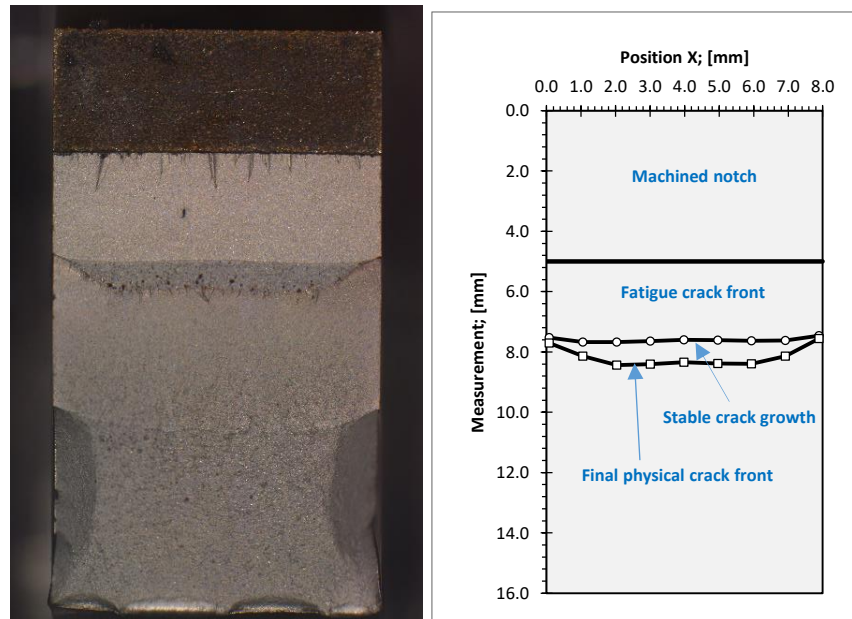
25 Fractographs of the crack surface (surface 1 of the FG1 specimen)
